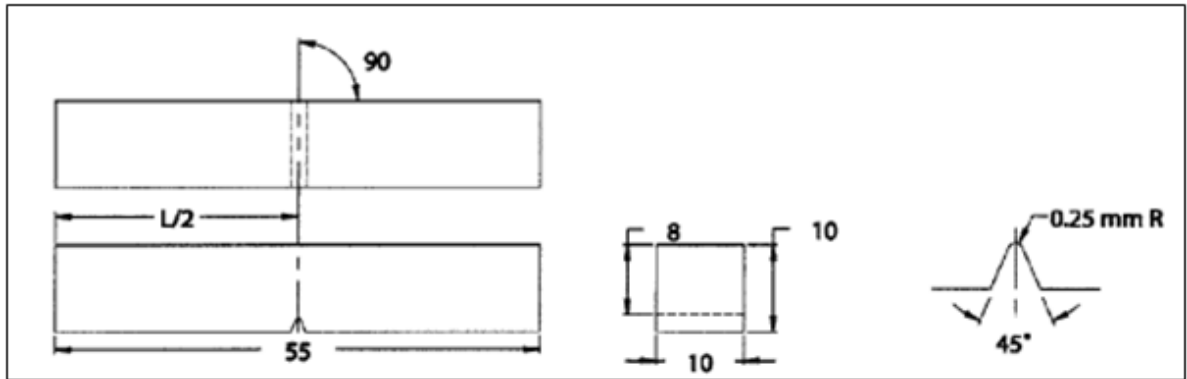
The dimensions of a Type "A" Charpy impact sample as per ASTM E23.
